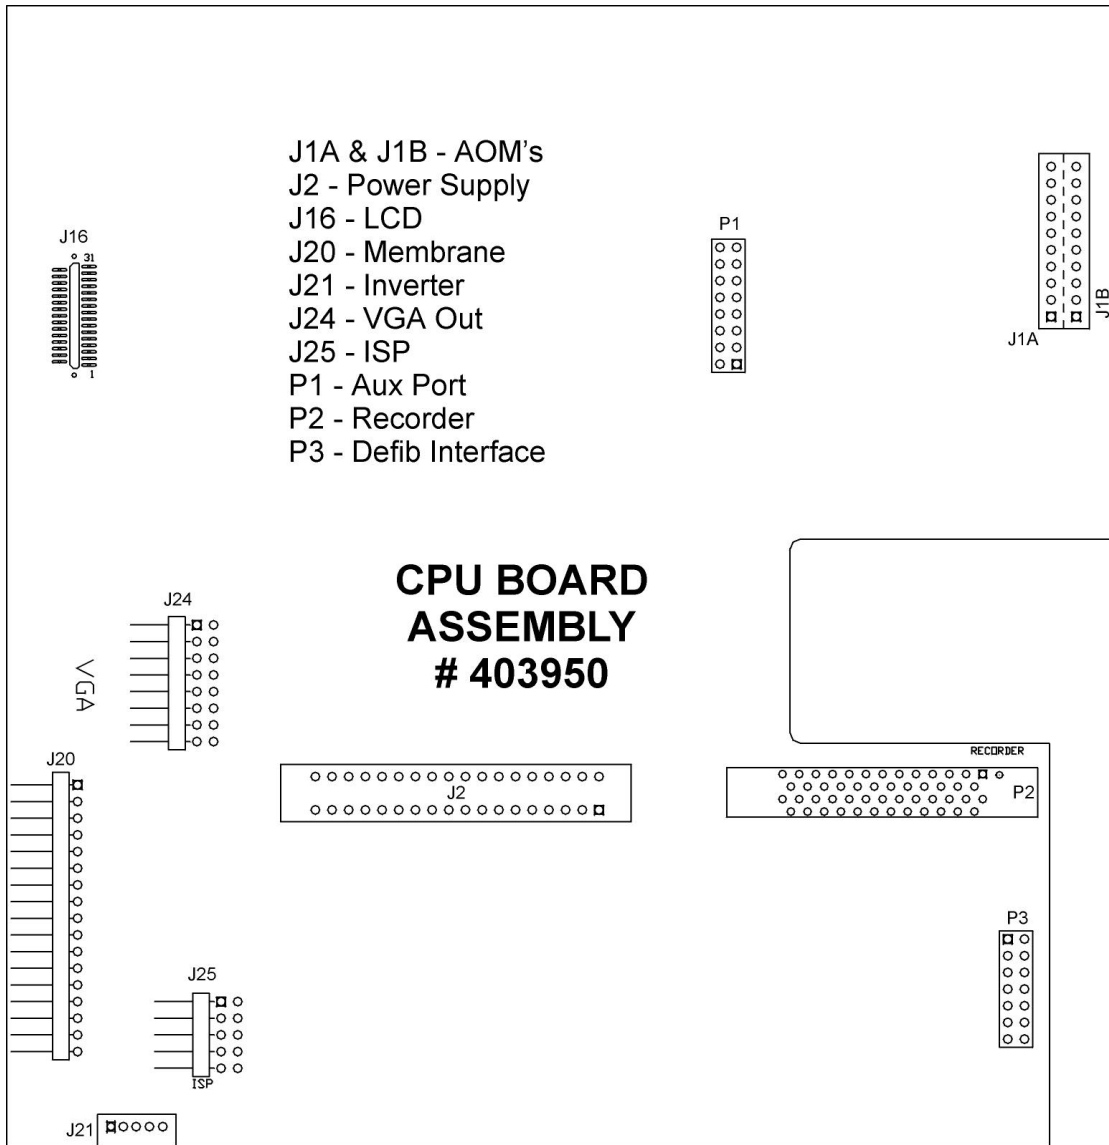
Connector Identification for PRISM CPU Board Assembly # 403950
